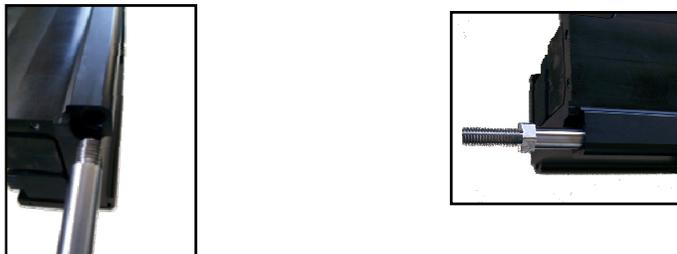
Insert short threaded side of bolt in pass-through and tighten to receiver face
